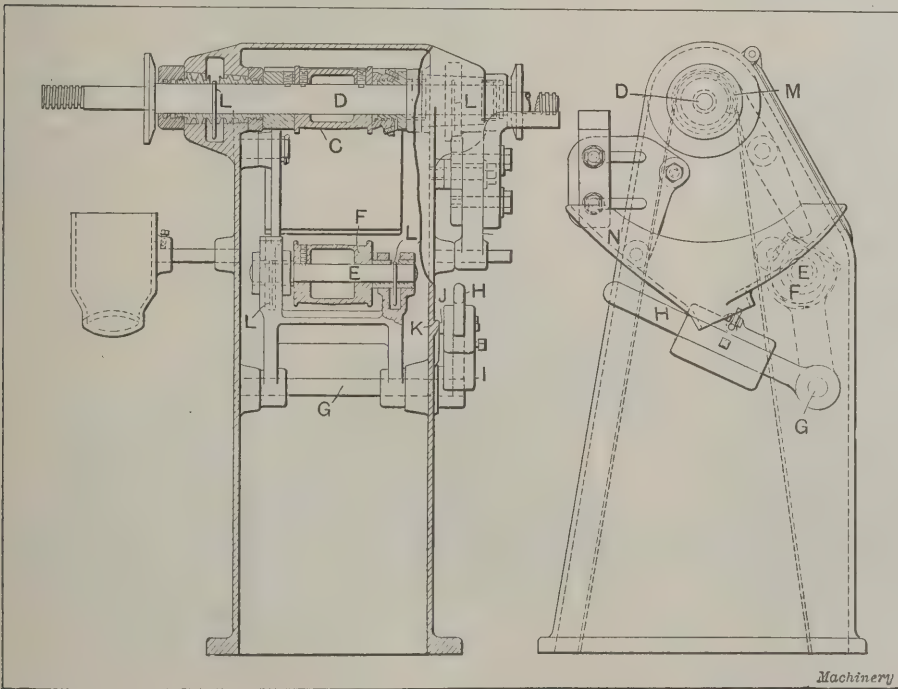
Views showing Idler Belt-tensioning Device of Wells Polishing Jack
